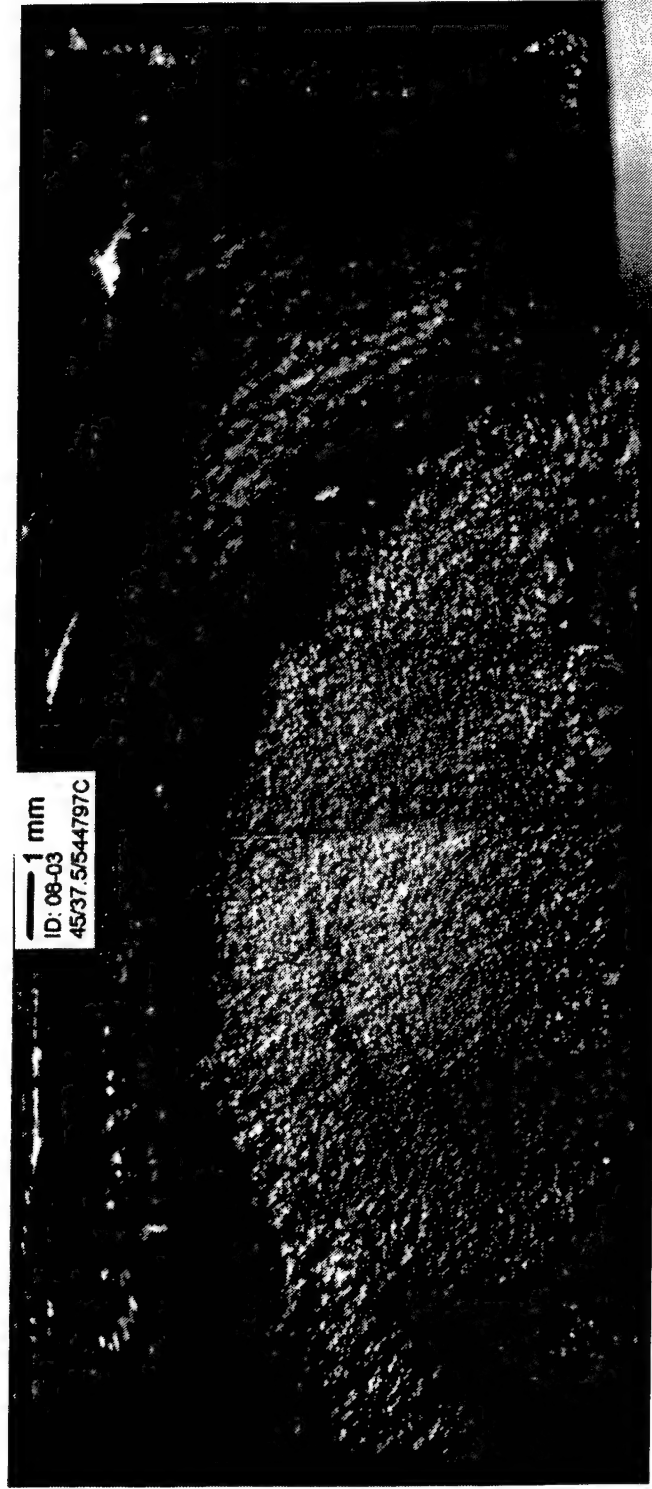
Fatigue fracture surface of the HSLA-80 but weld sample subjected to constant amplitude loading:
